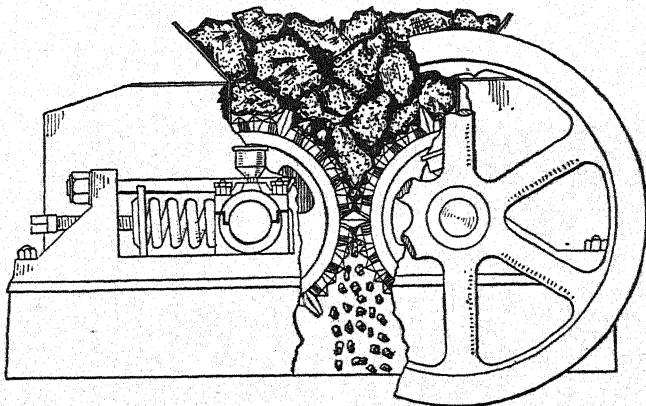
Coal crusher. (Courtesy of Link Belt Company.)
